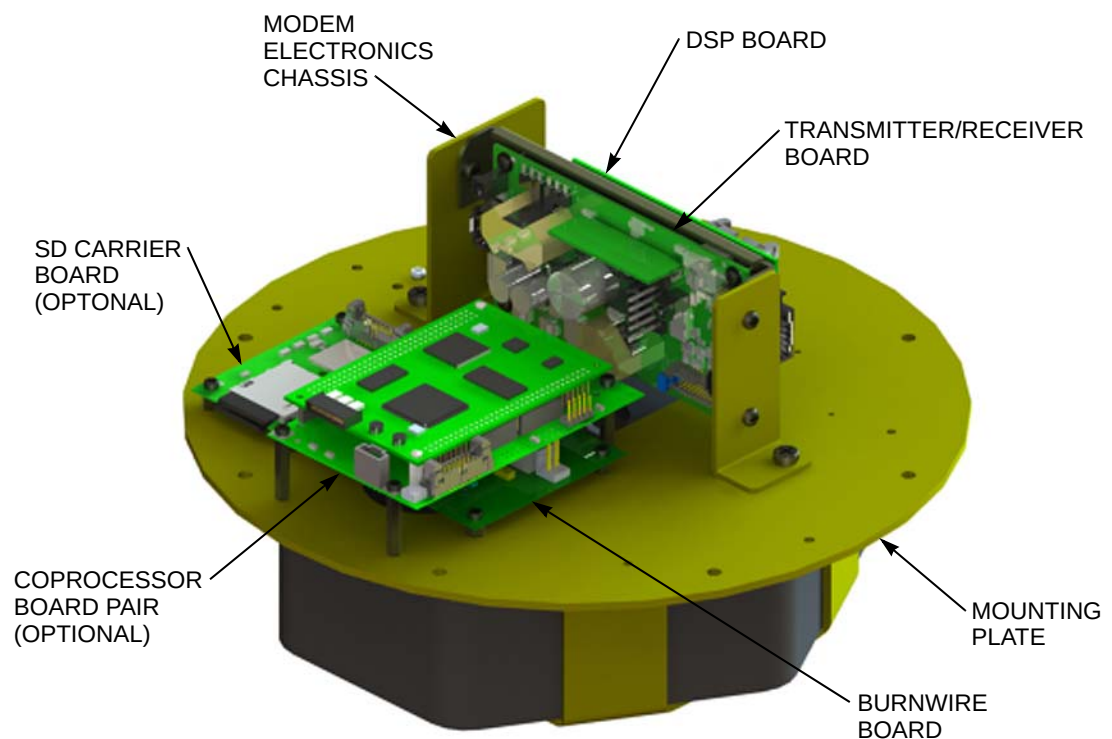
Modem Electronics with Burnwire, DSP, Transmitter/Receiver and Optional SD Carrier and Coprocessor Boards
